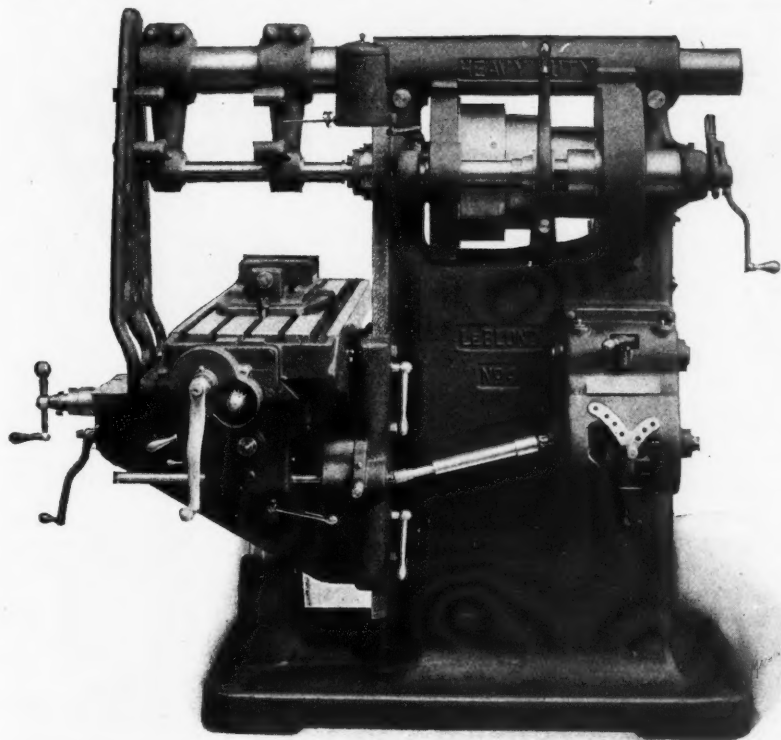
The Le Blond No. 4 Cone-type Milling Machine
